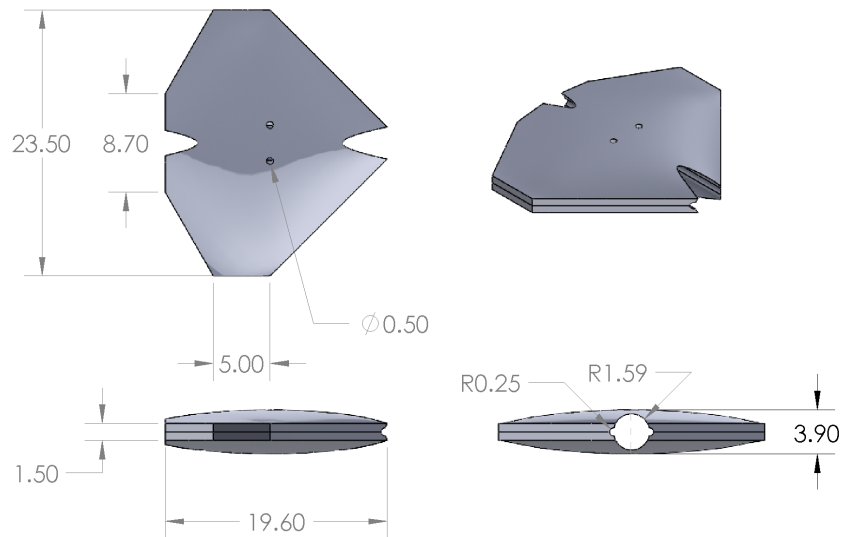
The final horizontal grid element design CAD model. Dimensions of units are in mm.
